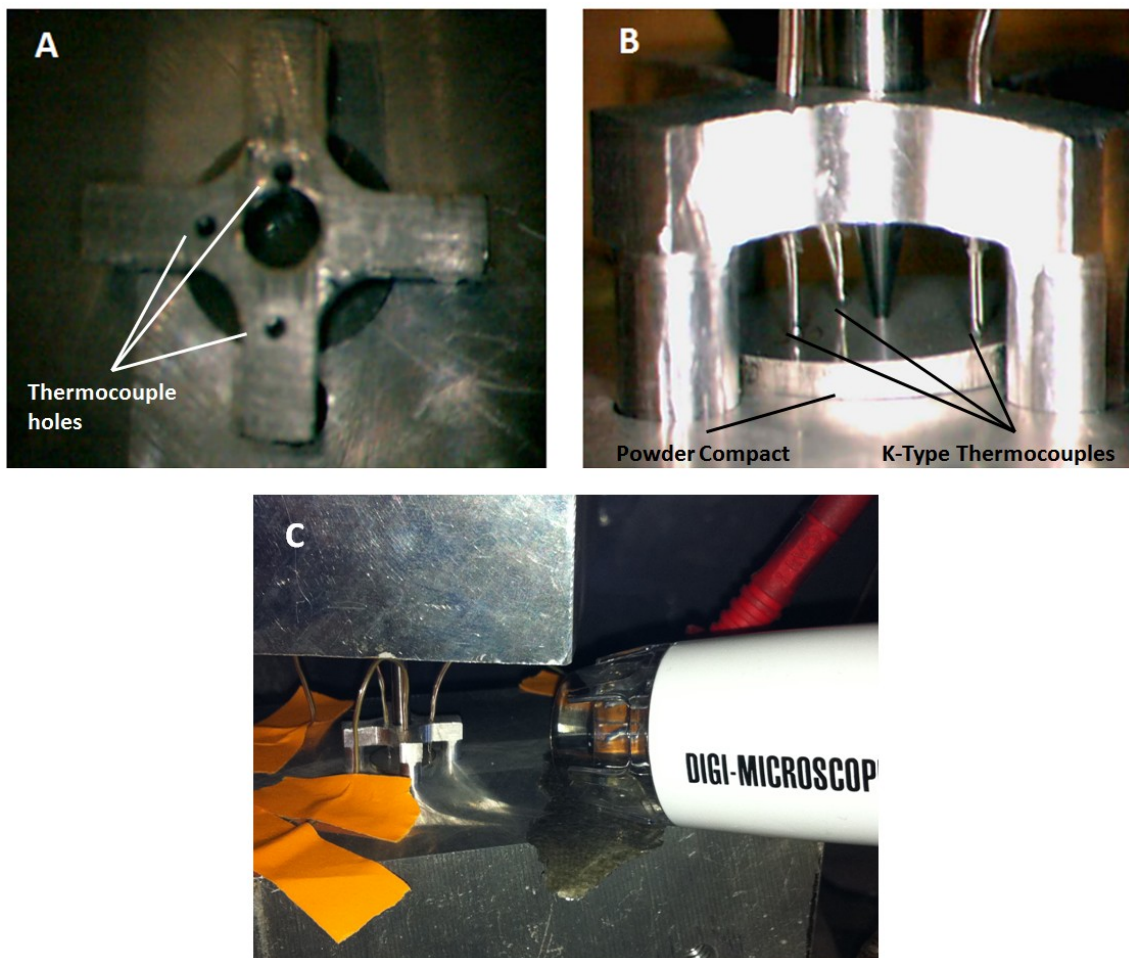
(a) Thermocouple holder with holes at different radial distances, (b) close-up photograph of tip-specimen-thermocouples configuration and (c) a photograph of the setup after all attachments are in place
